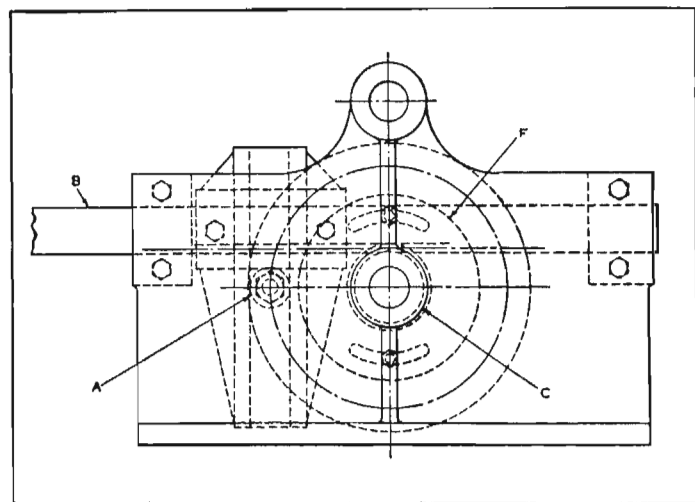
End View of Mechanism Illustrated in Fig. 18.
